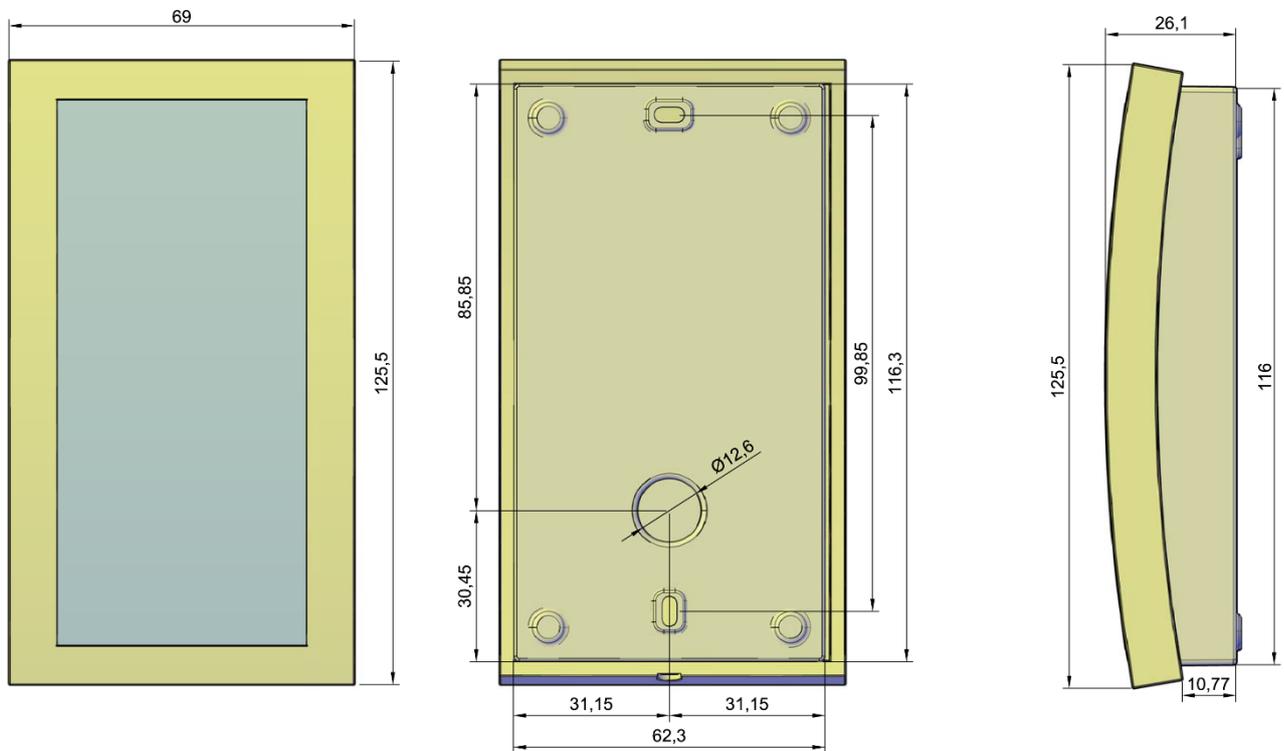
dimensional drawing of housing of ID Access 1500 + R-EA-WR-ET-HF-RO
